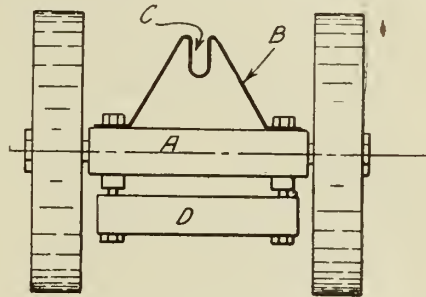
SHOWS END VIEW OF SULKY WITH LADLE REMOVED.
